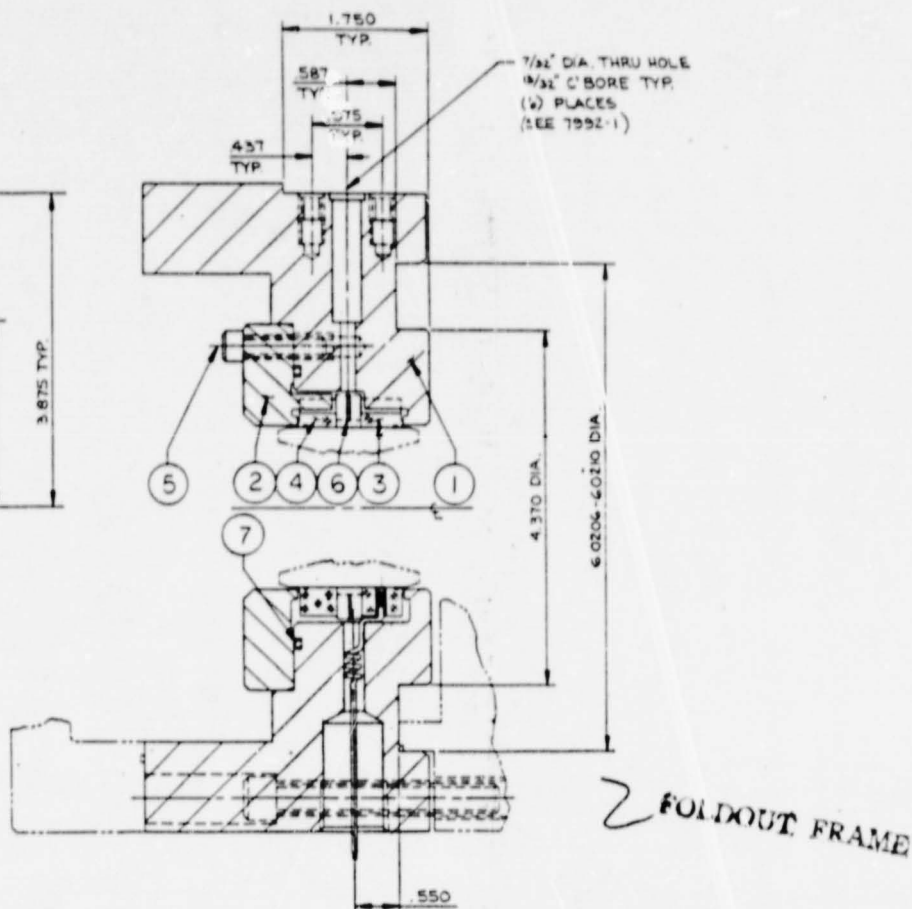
50-mm Helium Purge Bushing Seal Ass
